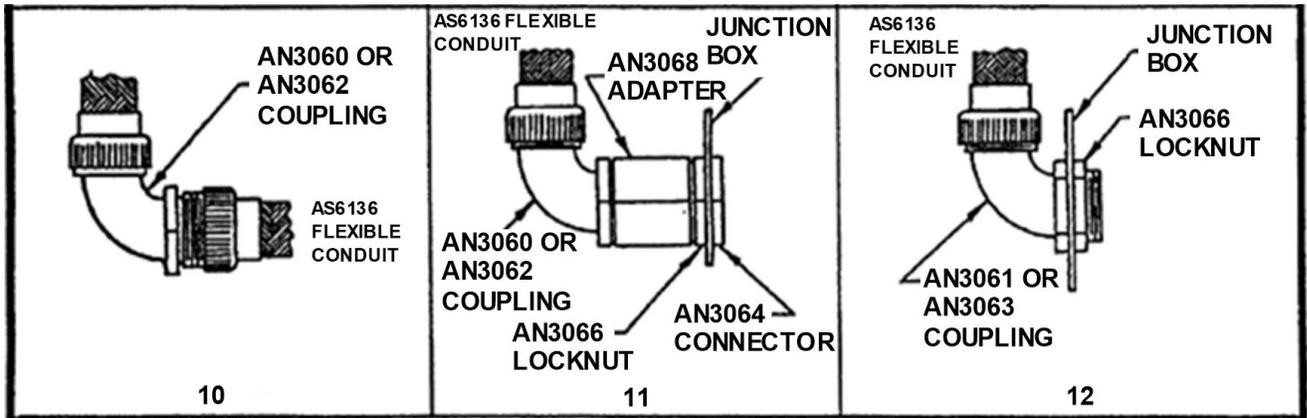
(CONTINUED) - COUPLING INSTALLATION METHODS ON FLEXIBLE CONDUITS, TUBING, OR CABLES
